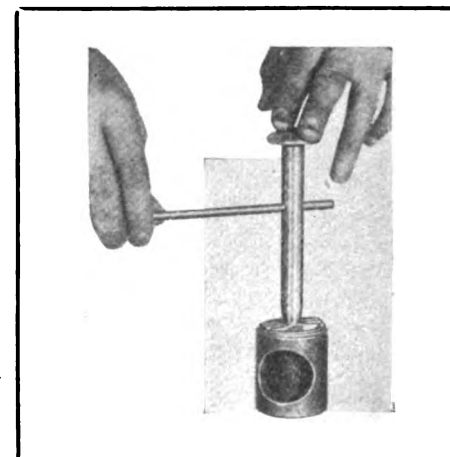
Another View of Tool Used for Re-Cutting the Seat.
